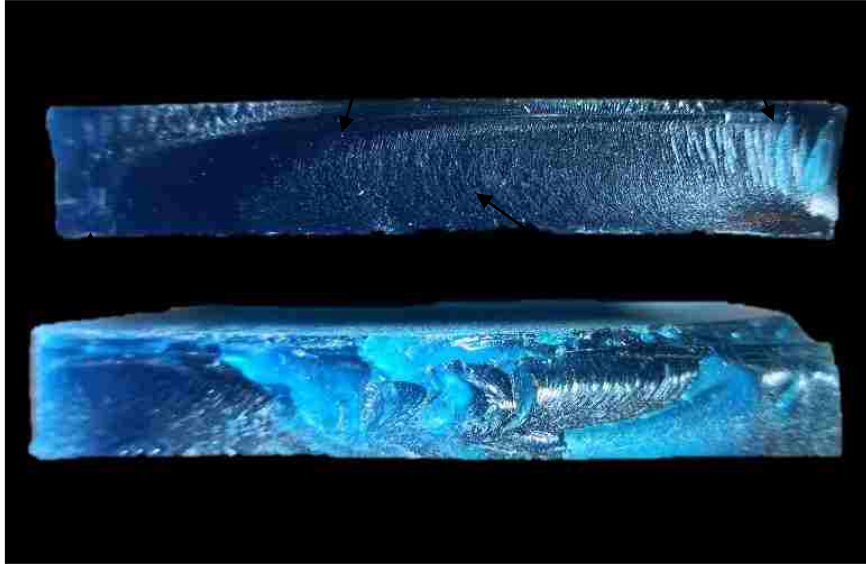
Fracture Surfaces of Homogeneous Samples a) Fatigue and b) Static Bending
